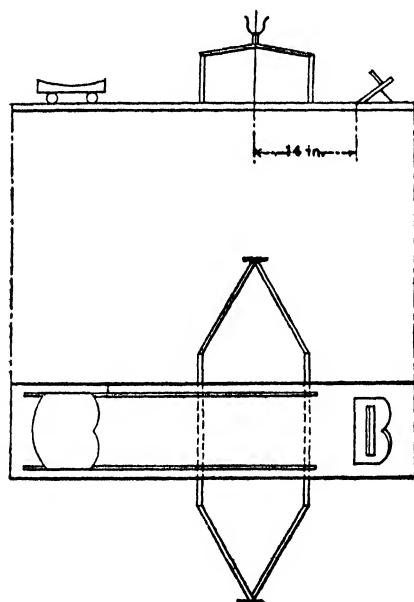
Plan and Side Elevation of Seat and Outriggers
